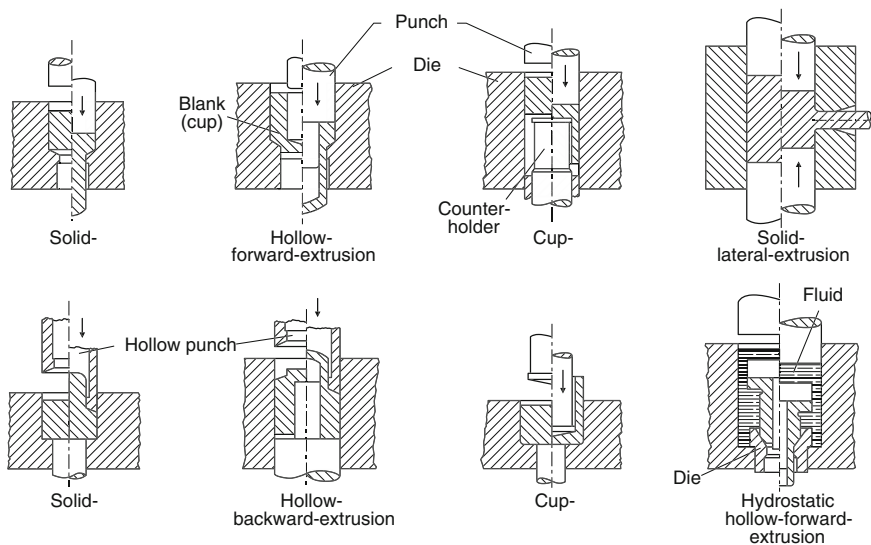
Compressive forming manufacturing processes [DIN03b]
